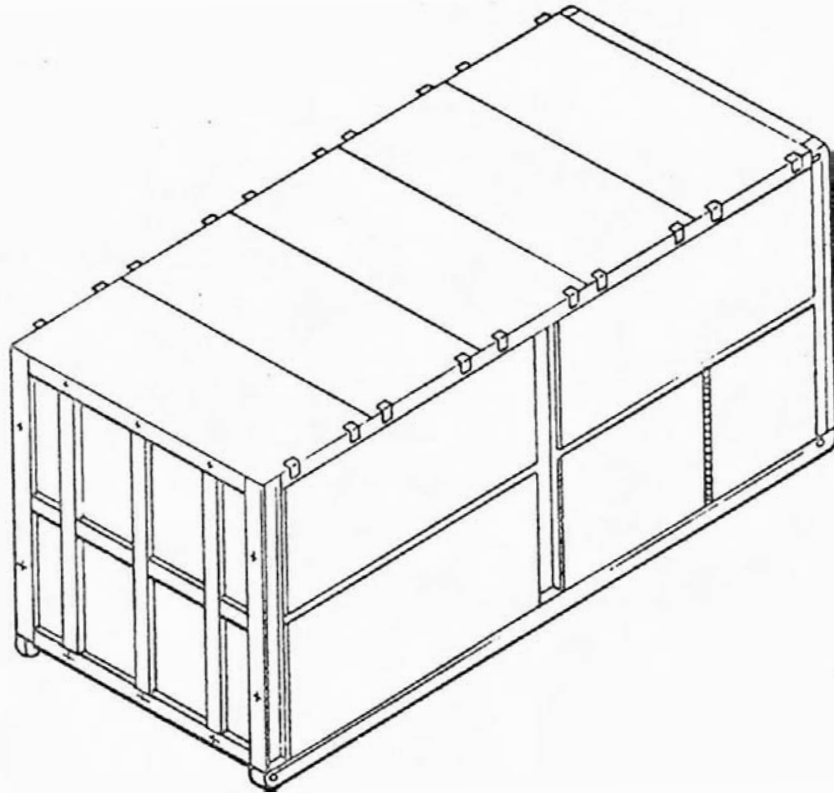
Skin Panel Assemblies Shipping and Storage Rack
